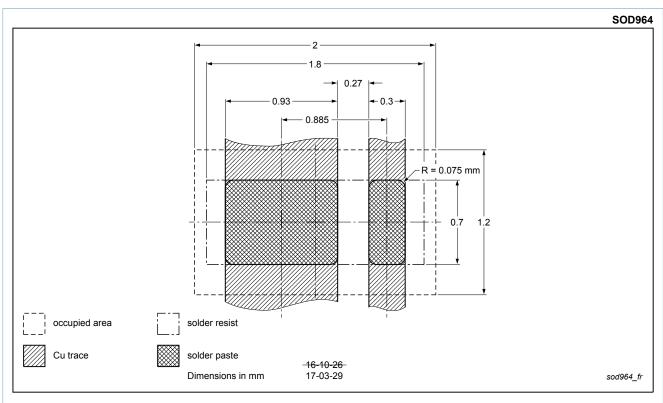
Reflow soldering footprint for DSN1608-2 (SOD964)
